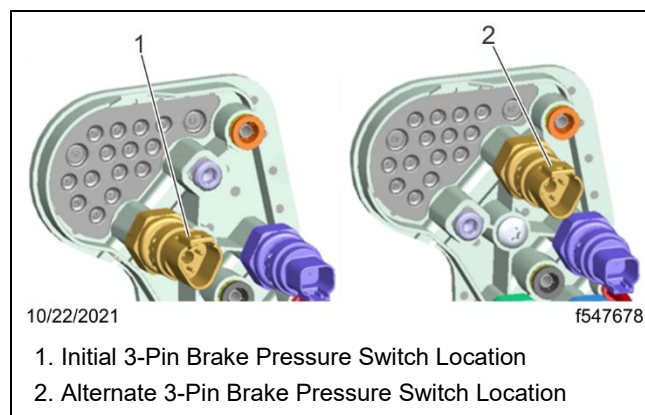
, Possible 3-Pin Brake Light Pressure Switch Locations
